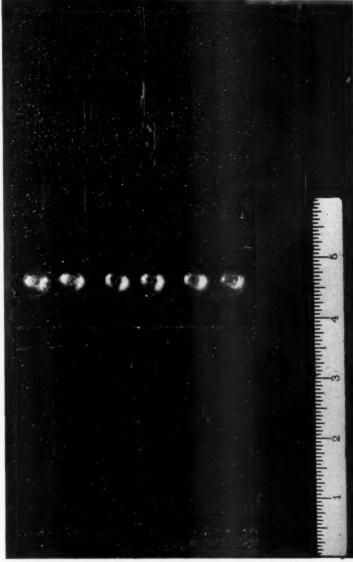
Top Surface of a Riveted AZ31A Magnesium Specimen, 0.064 in. Thick, After Being Exposed to Rural Atmospheric Conditions for a Six-Month Period.
